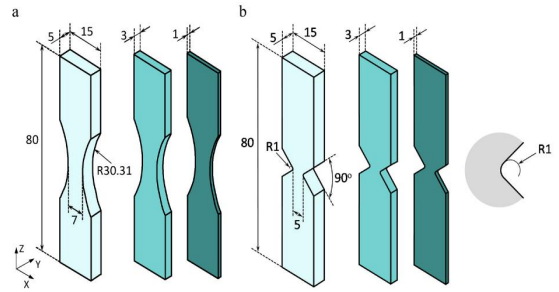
Geometrical dimensions of the test specimens, (a) unnotched specimens, (b) notched specimens (unit: mm)<sup>[15]</sup>
